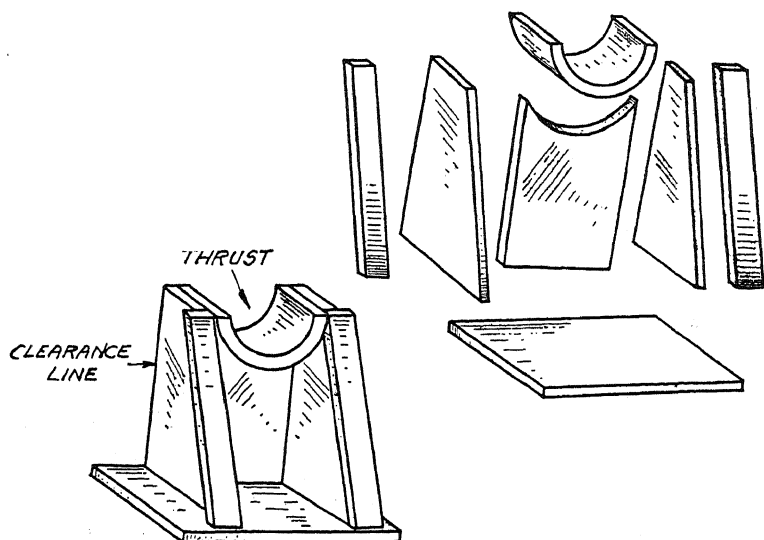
A simple bearing bracket. End thrust is taken care of without the need for extension or projection beyond clearance line.
